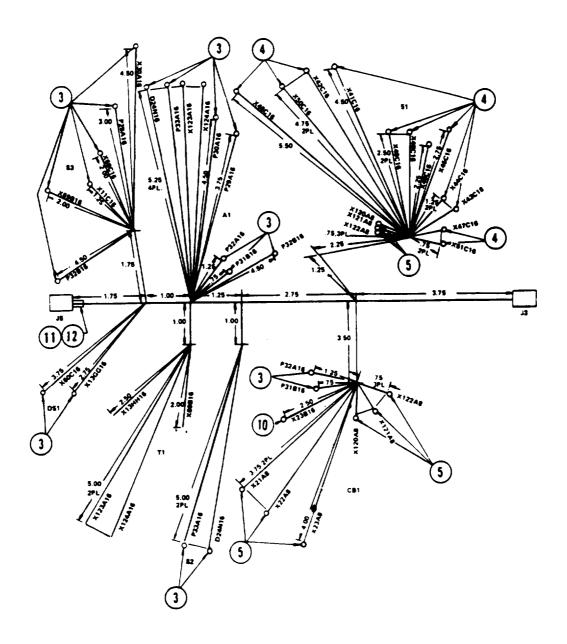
Control Box Assembly Branched Wiring Harness (Sheet 2 of 2), Drawing 72-2828
